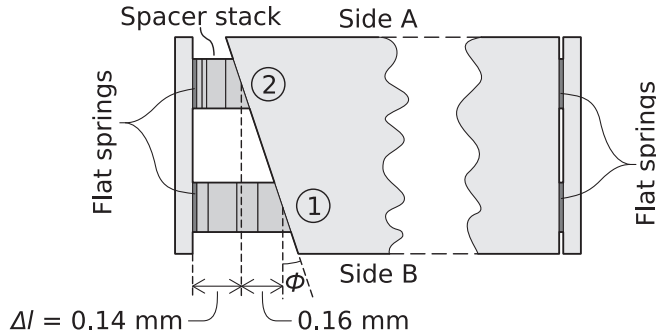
Schematic drawing about tuning the movable arm length of Swing II with stacks of thin spacers. Dimensional errors and spacer thicknesses are exaggerated. Mounting screws of spring holders are not drawn for clarity.
